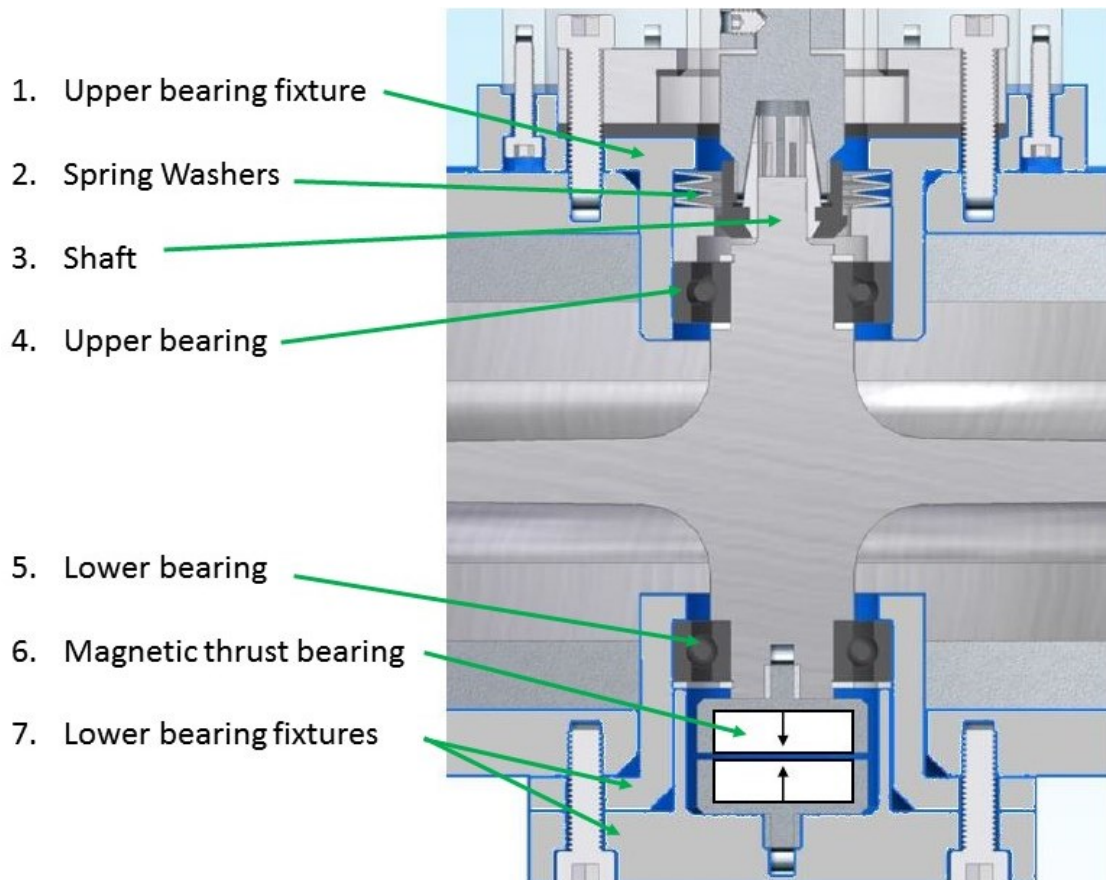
Labeled components for the upper and lower bearing sub-assemblies.
